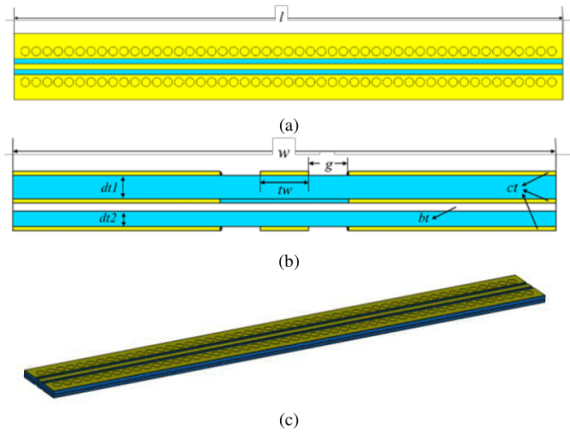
(a). Top view which is identical to the bottom view; (b). cross-section view of the PCB, where the bonding film is shown in white; (c). perspective view showing overall structure.
